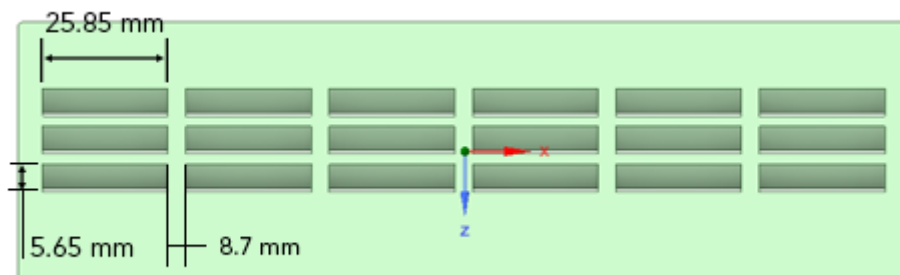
Dimensions and pattern for the Louvers shaped inlet holes.
